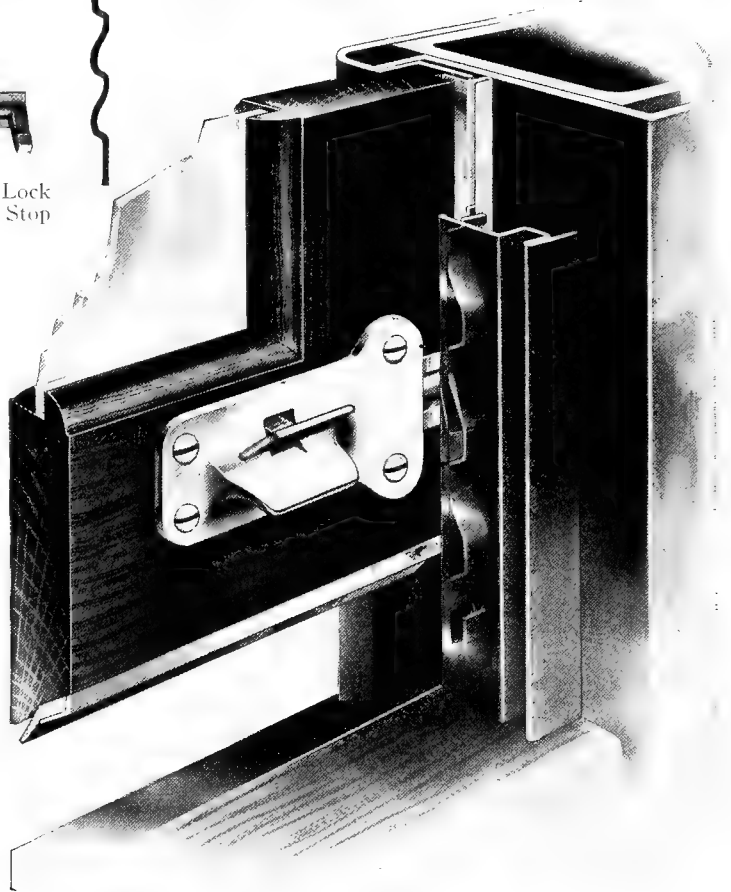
Edwards No. 13 Lock with Metal Stop Casing and Side and Bottom Weather Stripping Used on Steel Cars.
